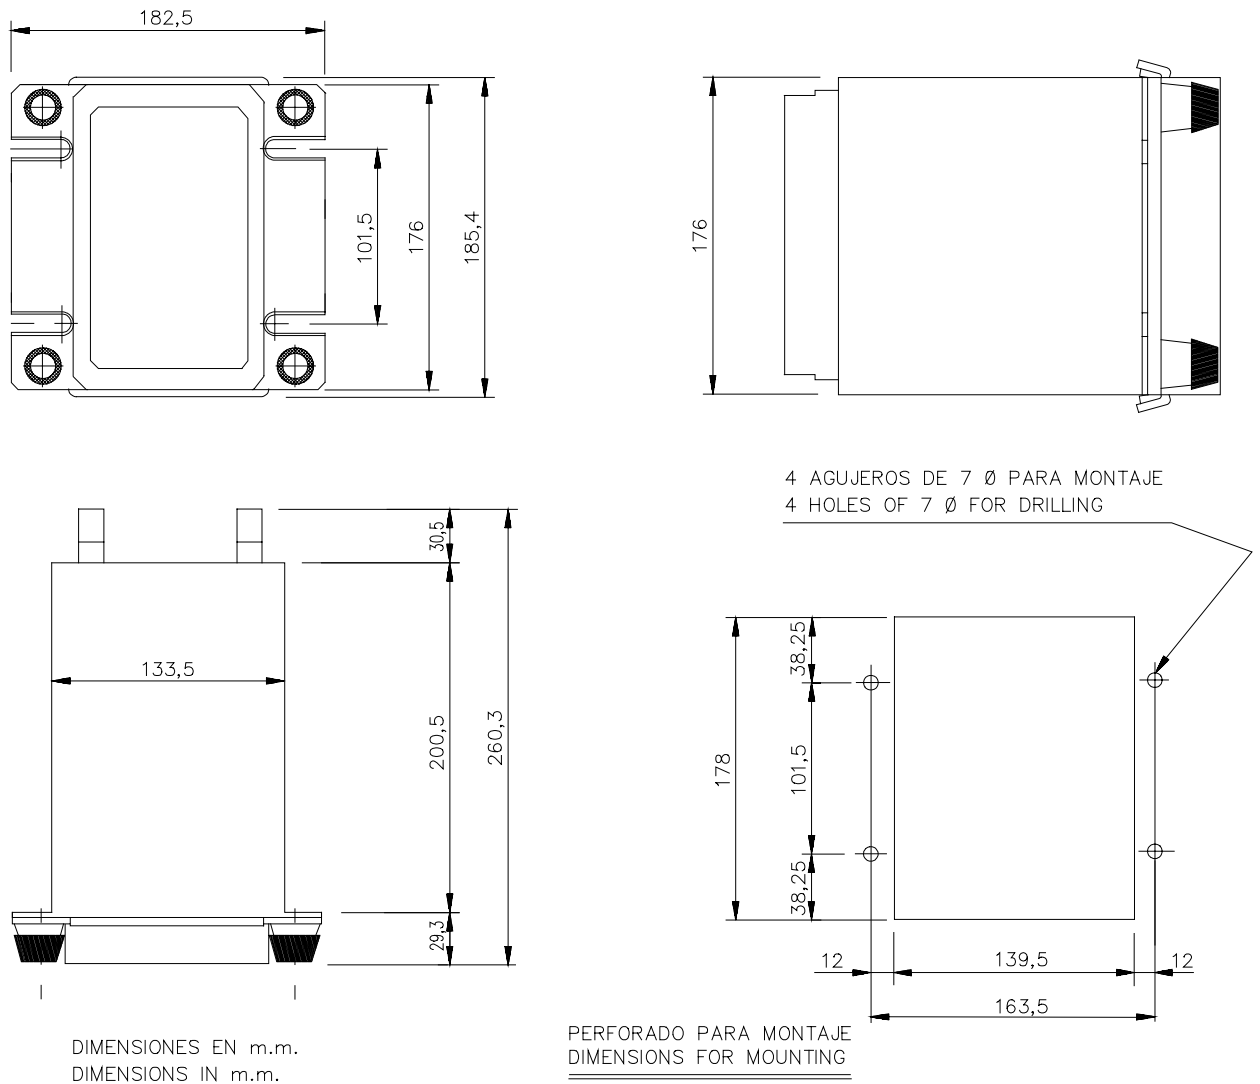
Dimensions and mounting of the MGC (non-drawout type) 226B6086F4
